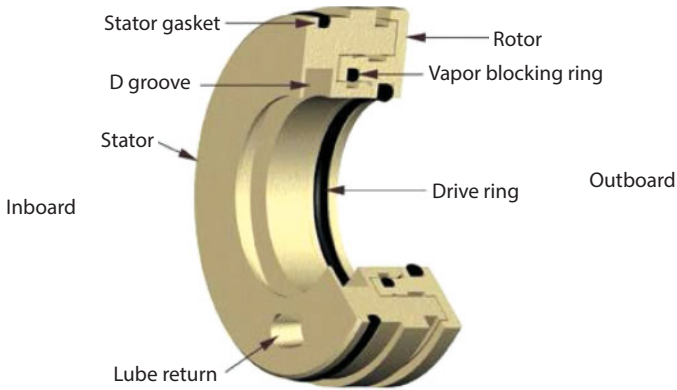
Bearing Isolators provide the most effective oil seals for bearing housings. (Courtesy of Inpro/Seal LLC)
